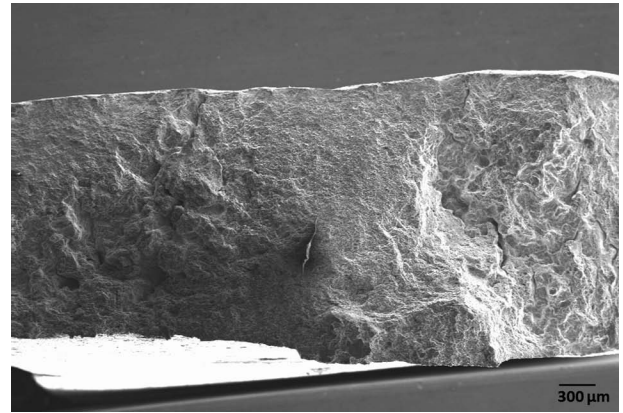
Fracture surface of a room temperature tensile-tested dissimilar TIG weld joint of AA 2219-AA 5083 taken at low magnification. The specimen failed on the AA 2219 side
